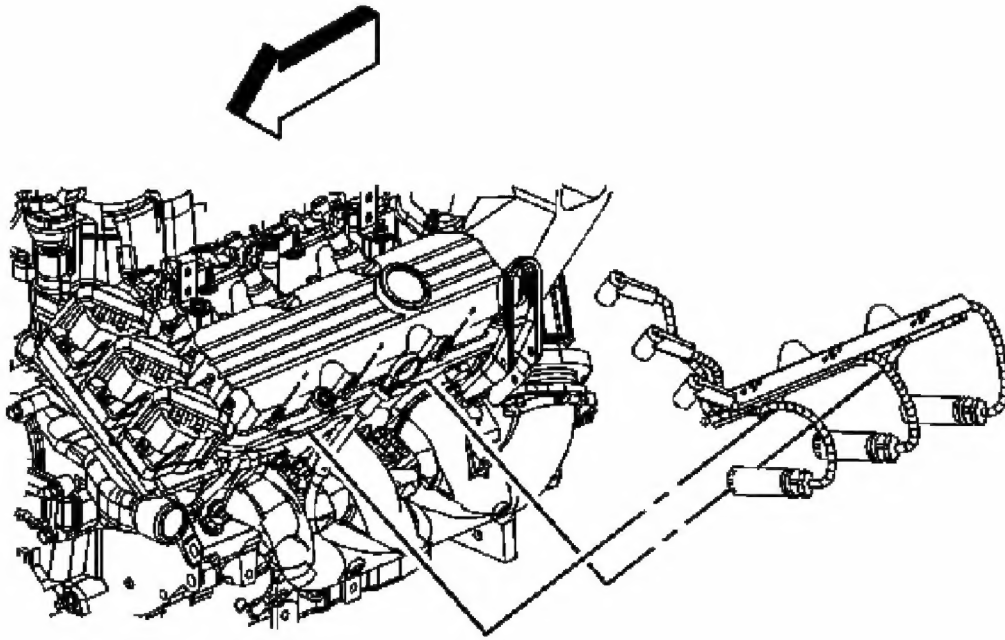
View Of Left Exhaust Manifold (RPO L26)
